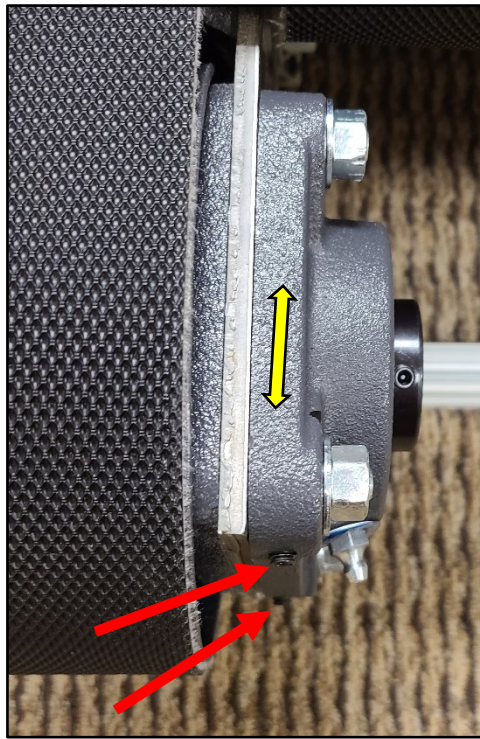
Additional Center Tension Adjustment. The set screws, shown by the red arrows, contact the bolts attaching the bearing to the take-up mechanism. They can be tightened or loosened to move the right bearing block forward or backward relative to the left shaft.
